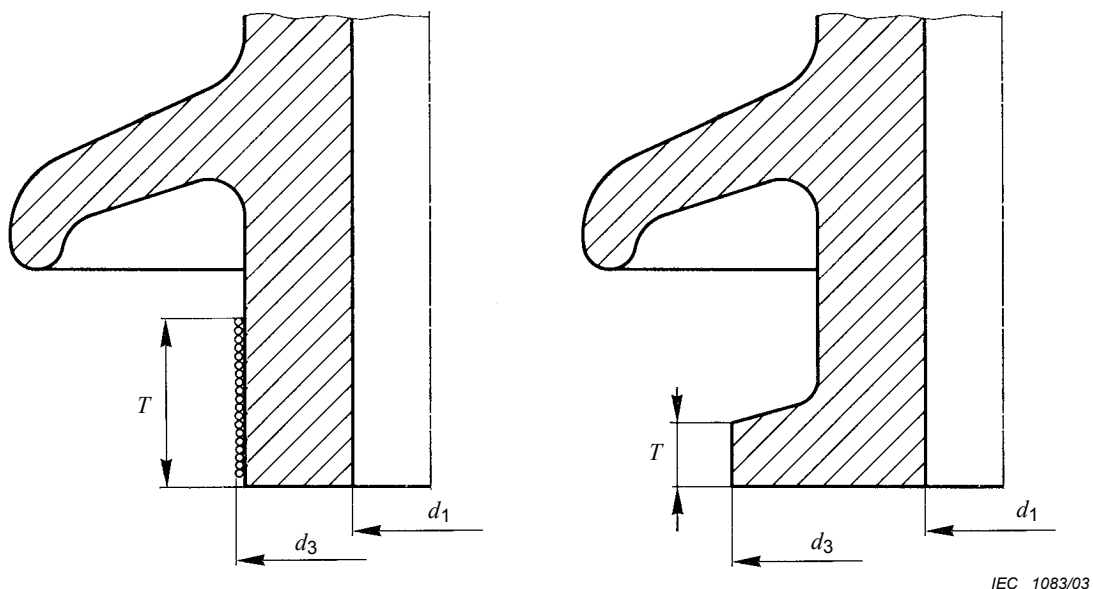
Tolerance on height of sanding and porcelain chamfered end flange
